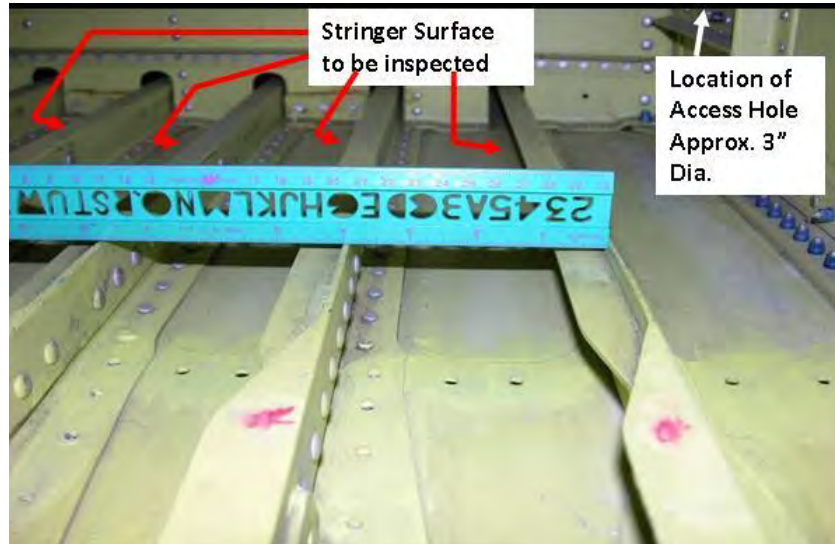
Primary selected A-10 wing inspection area, on the stringer runouts opposite the front spar access hole.
